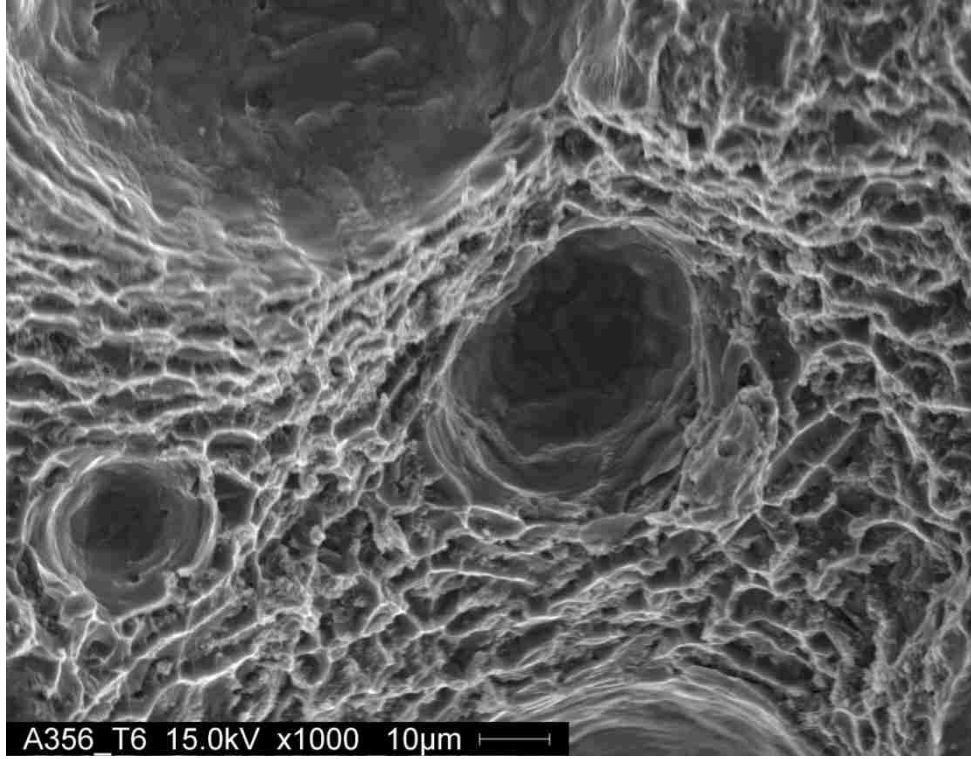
Fractograph of the tensile specimen of welded T6 cast alloy A356.
